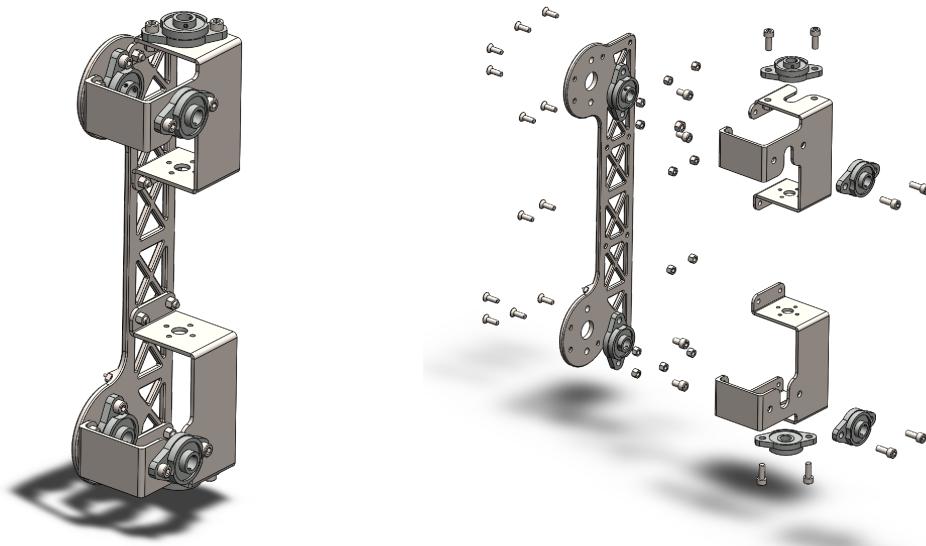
The upper-arm linkage in its assembled and exploded state. This sub-assembly consists of several sheet-metal parts, 6 flange bearings for mounting the axles of the joints and several pieces of mounting hardware such as screws and nuts.
